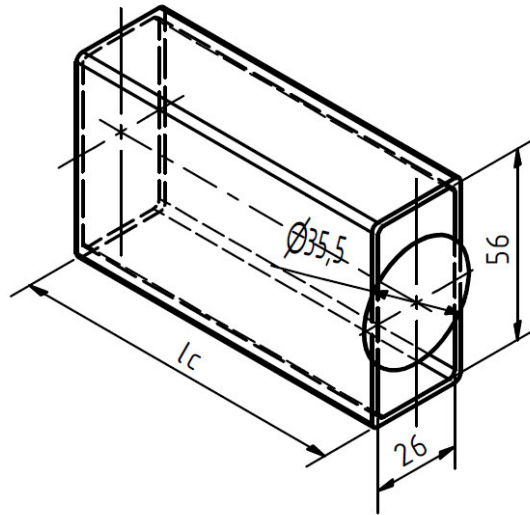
Cross section and hydraulic diameter of the standardized, rectangular conveying pipe.
